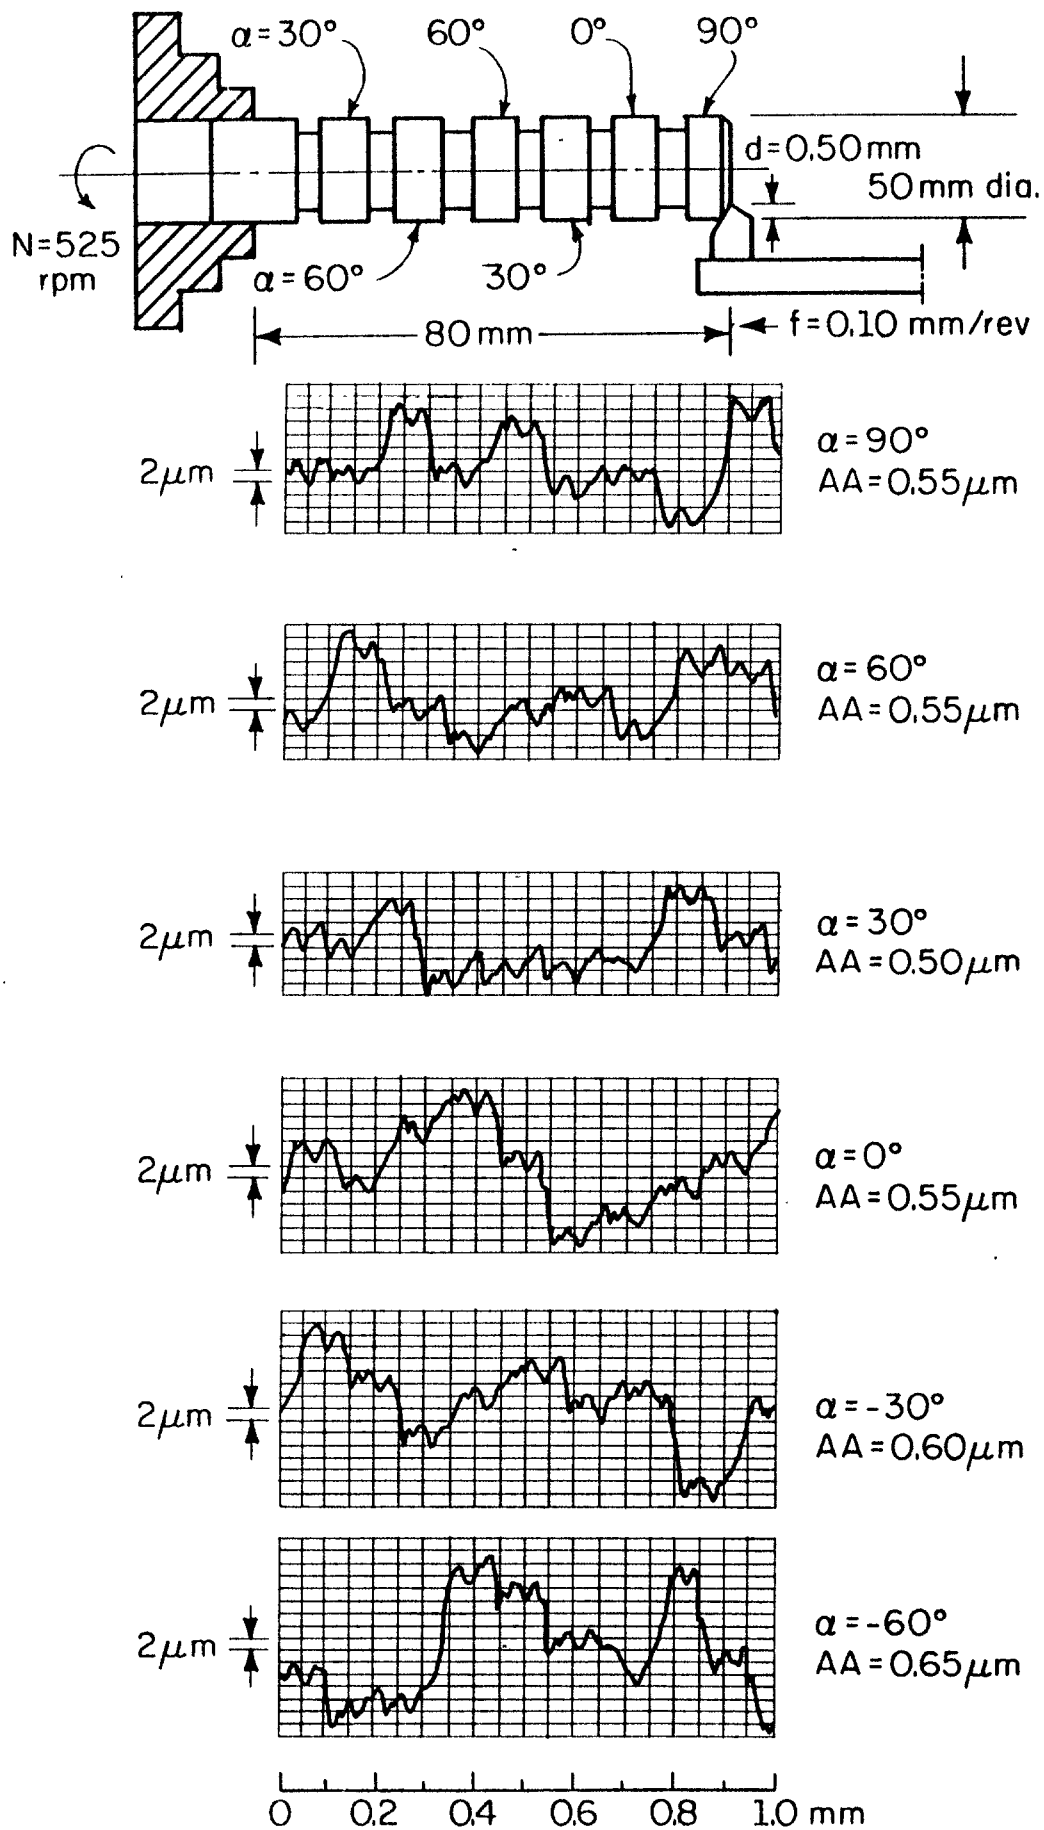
Experimental Setup and Typical Profile Traces Taken from the Machined Surfaces
